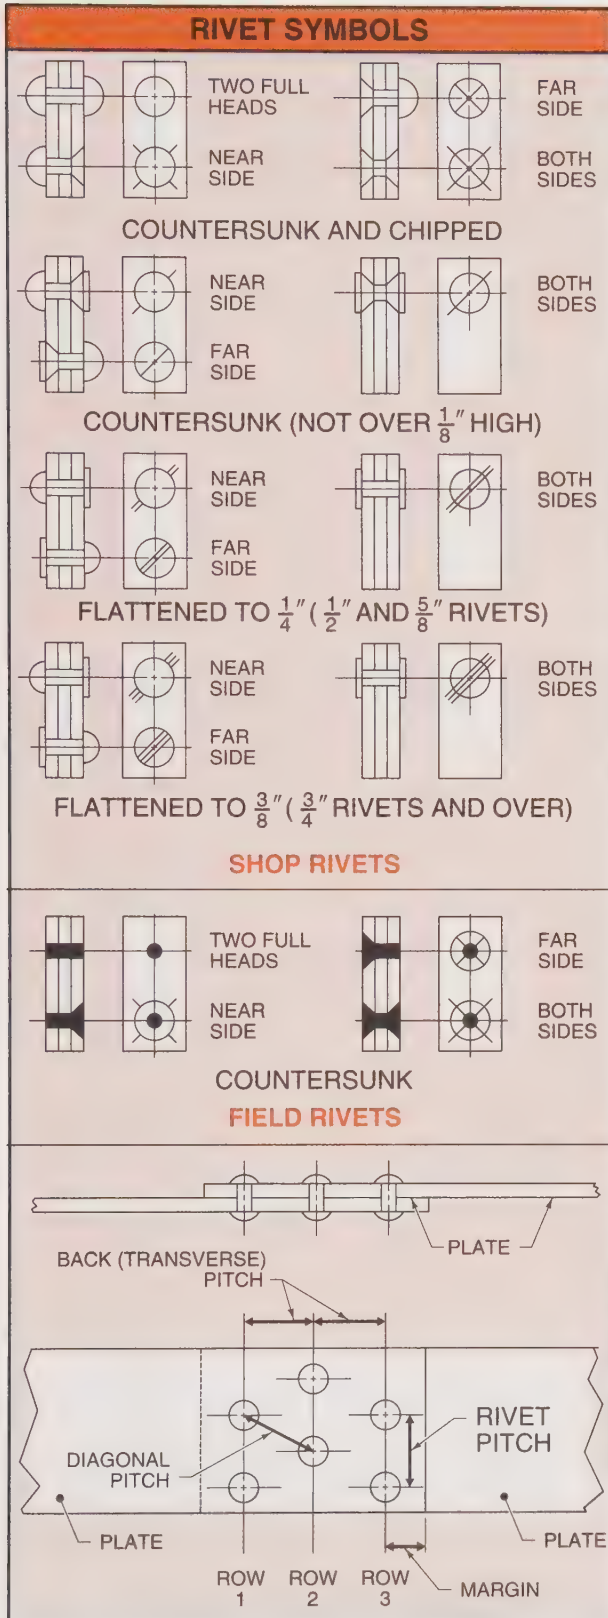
Conventional rivet symbols are used to show rivets on prints.
